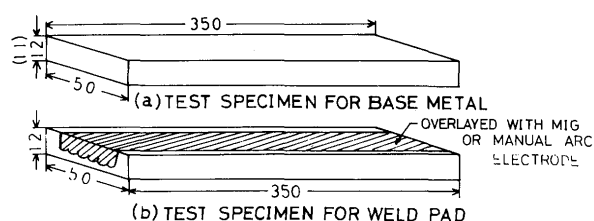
Shape and dimension of test specimen used for the Varestraint Test.
